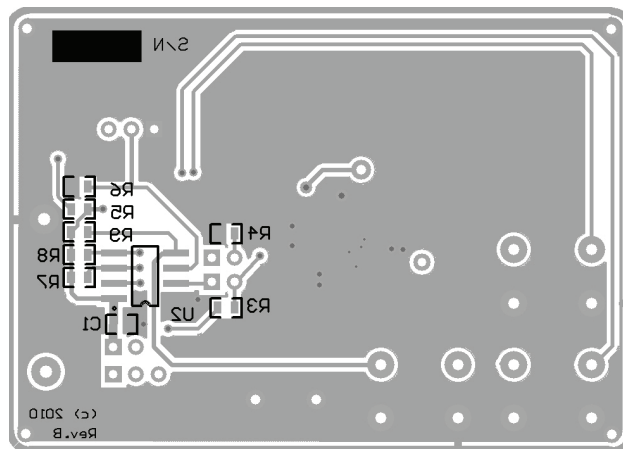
AAT1401 Evaluation Board Bottom Side Layout.
